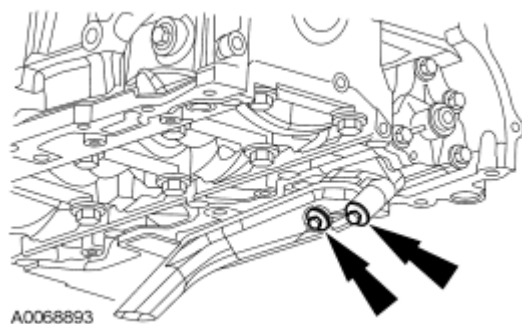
Locating Oil Pump Pickup Tube Bolts
